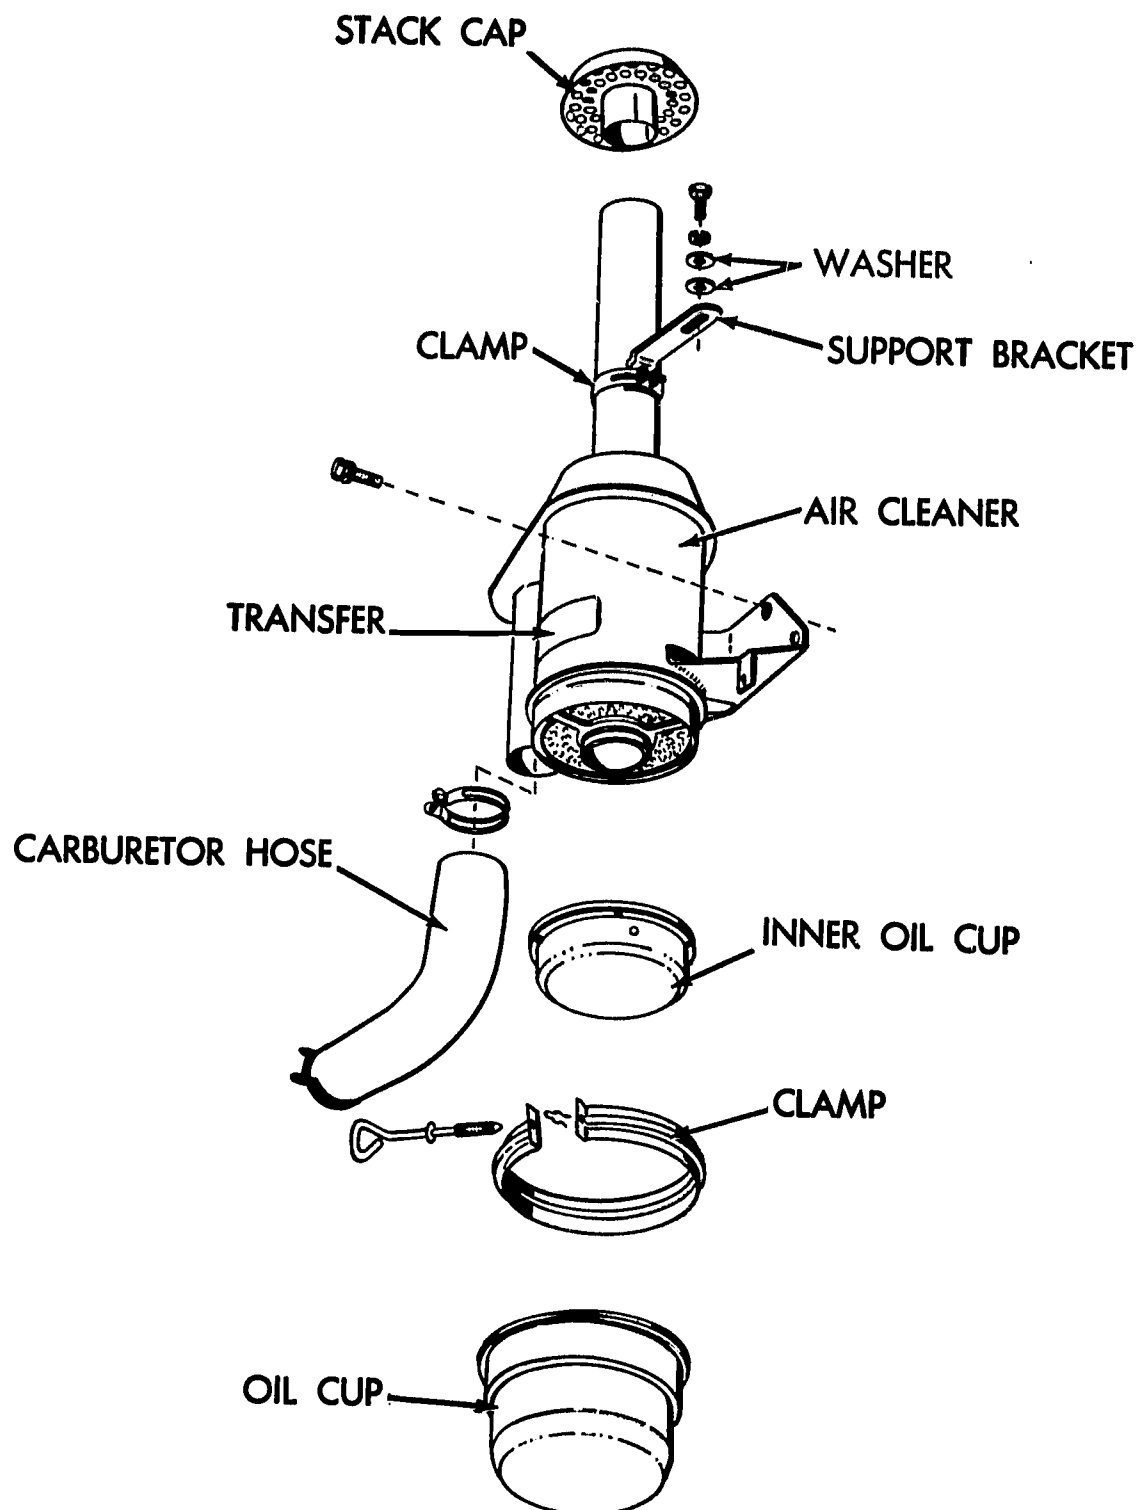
B. — An exploded view of an oil bath type air cleaner.
